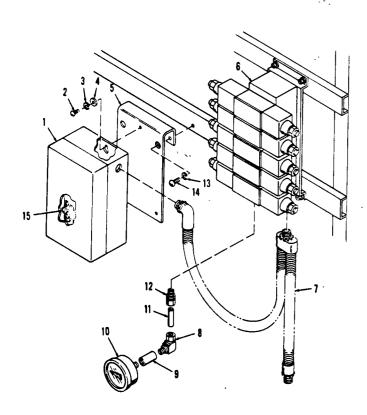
HYDRAULIC MOTOR STARTER ARRANGEME	NT.
